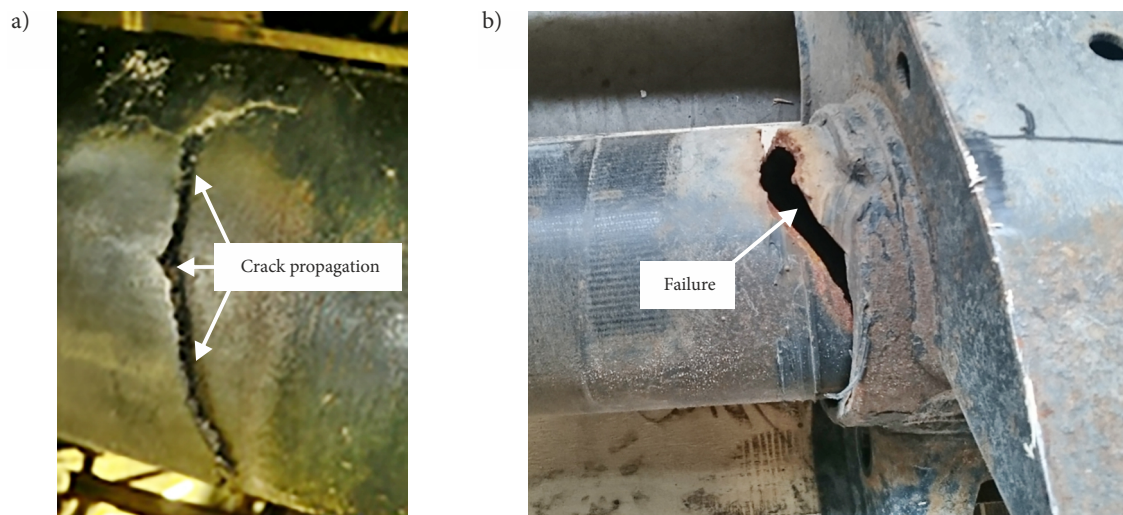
Axles: a – crack not at the mounting position, visible fracture split; b – crack not at the mounting position, total failure
